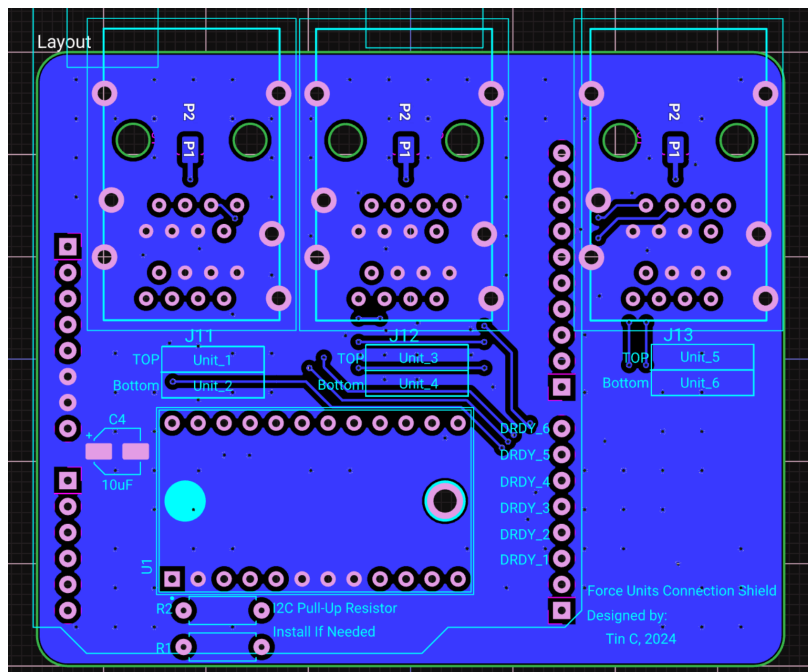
Force Sensor System Arduino Shield Board Layout - Bottom Layer
